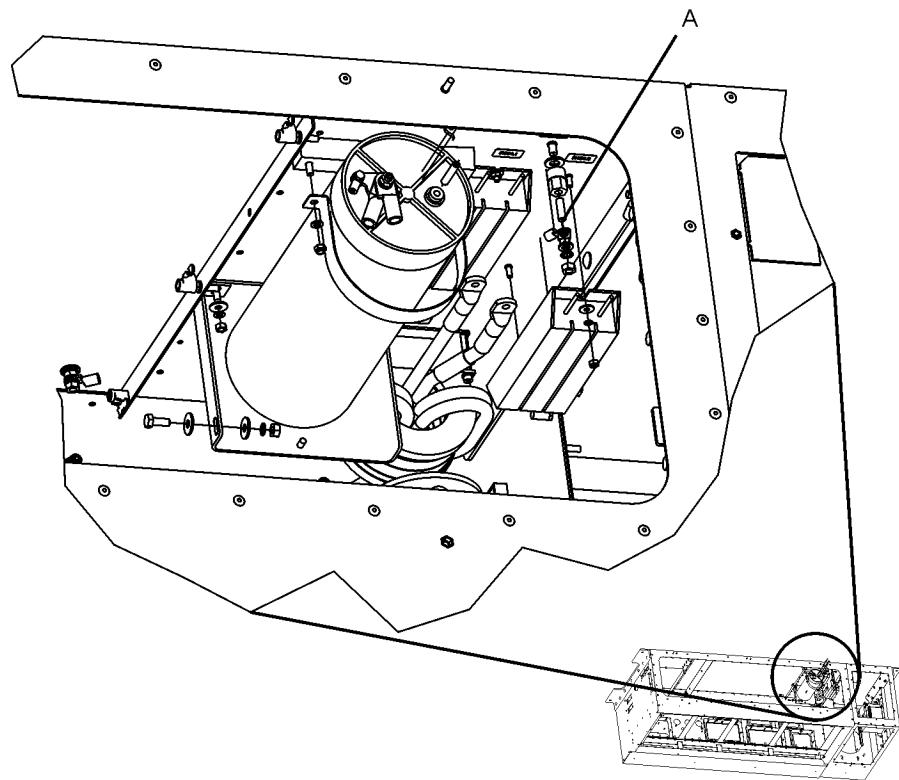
R104.1-2 Electrical Connections on STP-R104
